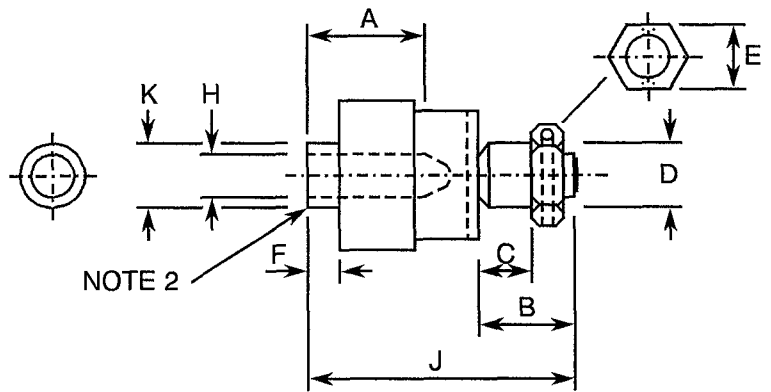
PHYSICAL DIMENSIONS(CONTINUED)
